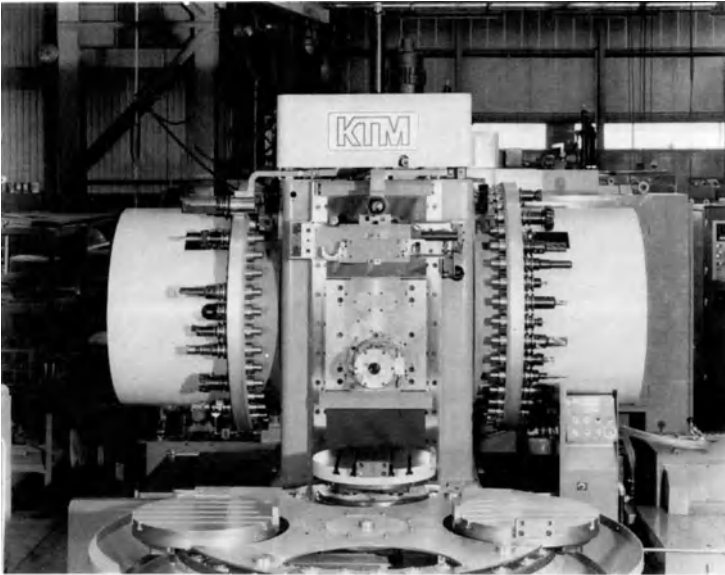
Twin rotary carousels on a palletised horizontal machining centre. [Courtesy of FMT Ltd.]
